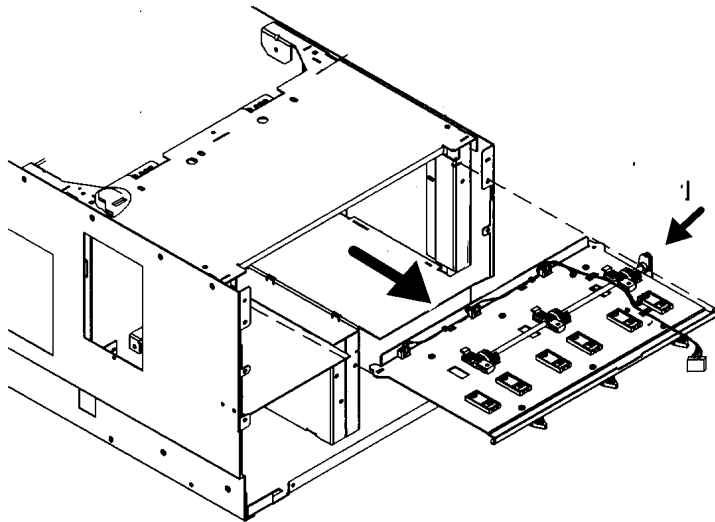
Sliding the Removable Magazine Guide Assembly Out of the Chassis
